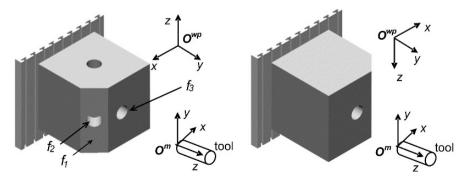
Sample workpiece setup (i) and setup (iii)
